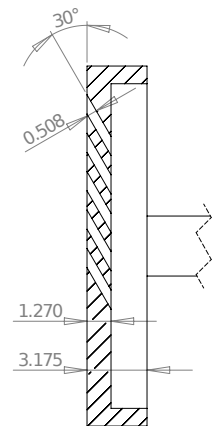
Drawing of five trench row test coupon; freestream flow from bottom to top; dimensions in mm
